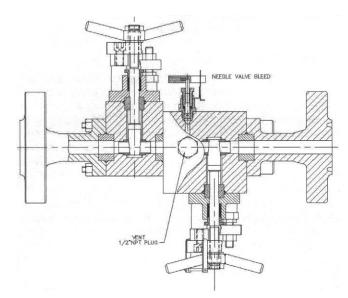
A larger double and bleed valve Courtesy of Sabre Instrument Valves Ltd
